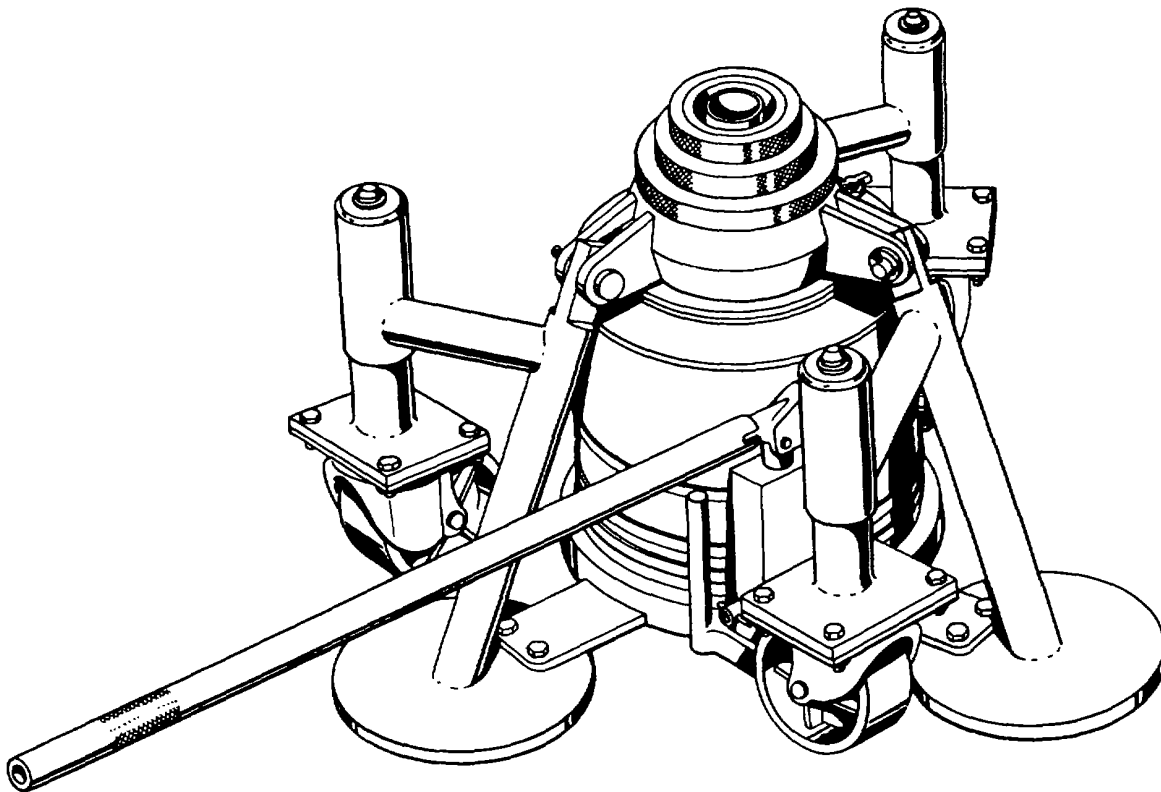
12-Ton Fixed-height Tripod Jack Assembly.
